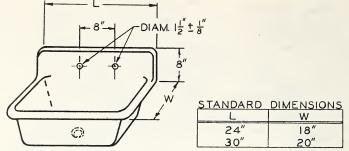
One-piece roll-rim kitchen sinks with back. (See par. 4.20.)
